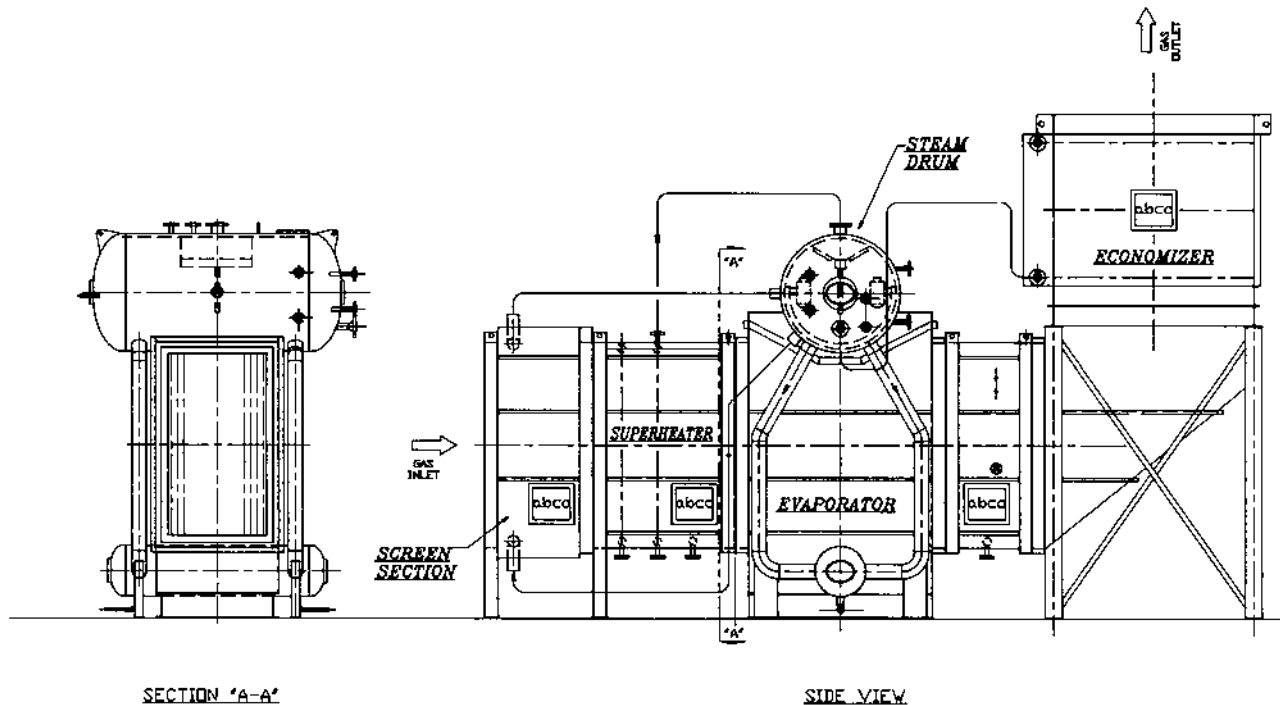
Water tube waste heat boiler with superheater and economizer. (Courtesy of ABCO Industries, Abilene, TX.)
